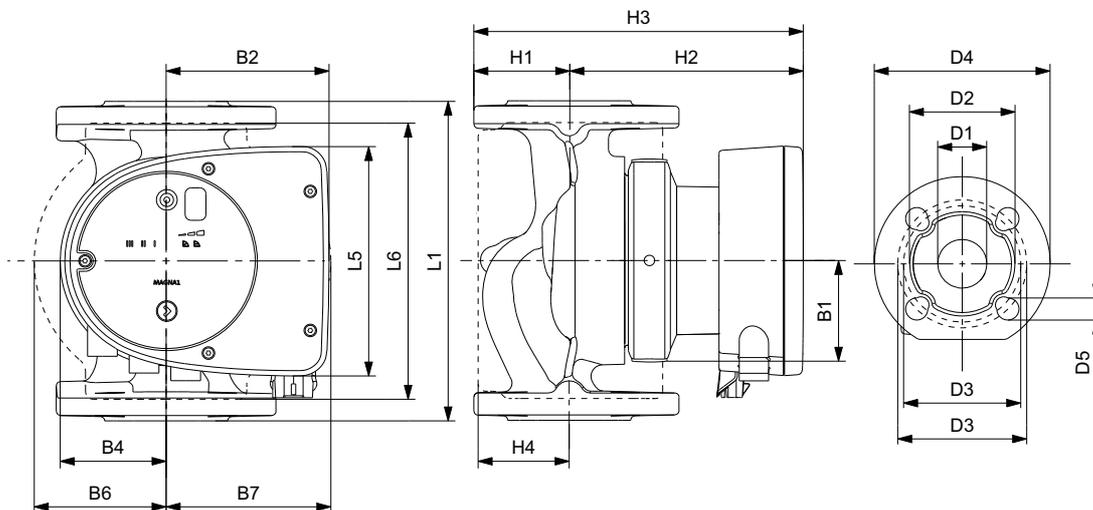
Single-head pump dimensions, plug-connected versions, flanged version
